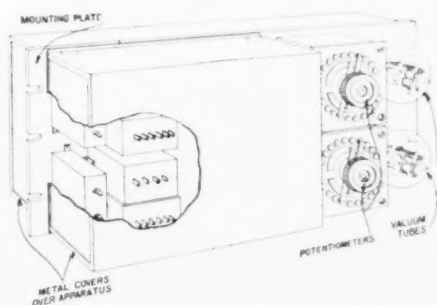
Typical Assembly of Panel Mounted Repeater Set
